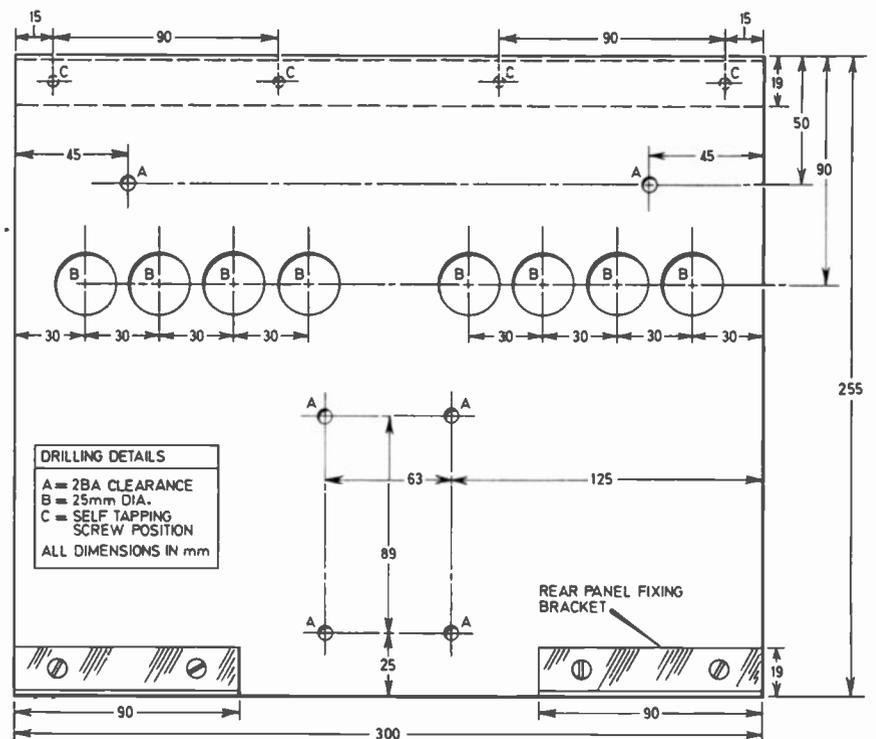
Dimensions and drilling instructions for the base panel which in the prototype was constructed from 9mm thick plywood. Note that the rear panel fixing rails are shown screwed in place.
